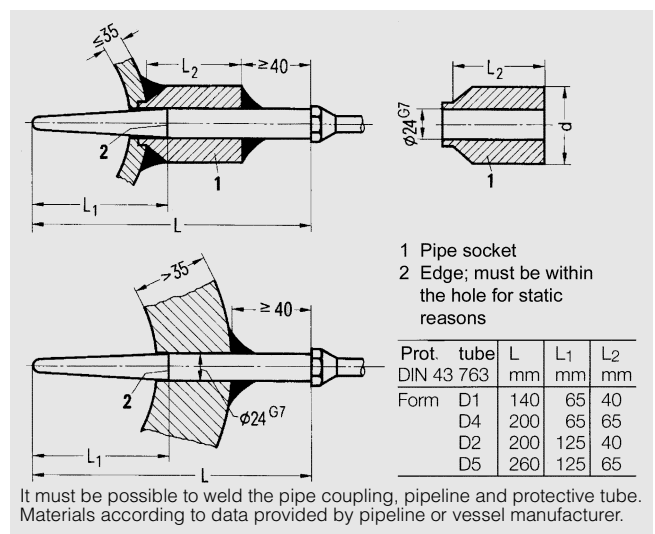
/7 Welding-type protective tubes, mounted; top: wall thickness ≤ 35 mm; mounting using welded coupling; bottom: wall thickness > 35 mm
